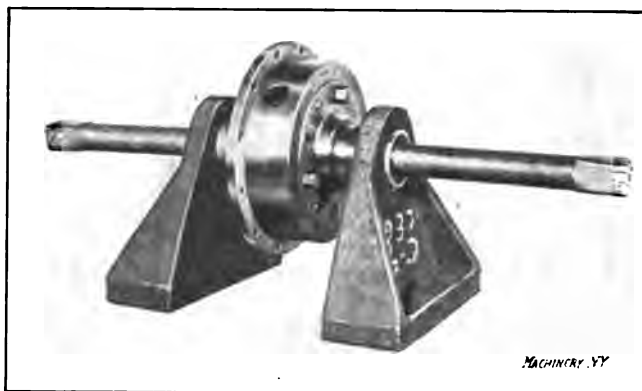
A Completed Equalizing Gear Set up for Testing to Destruction
